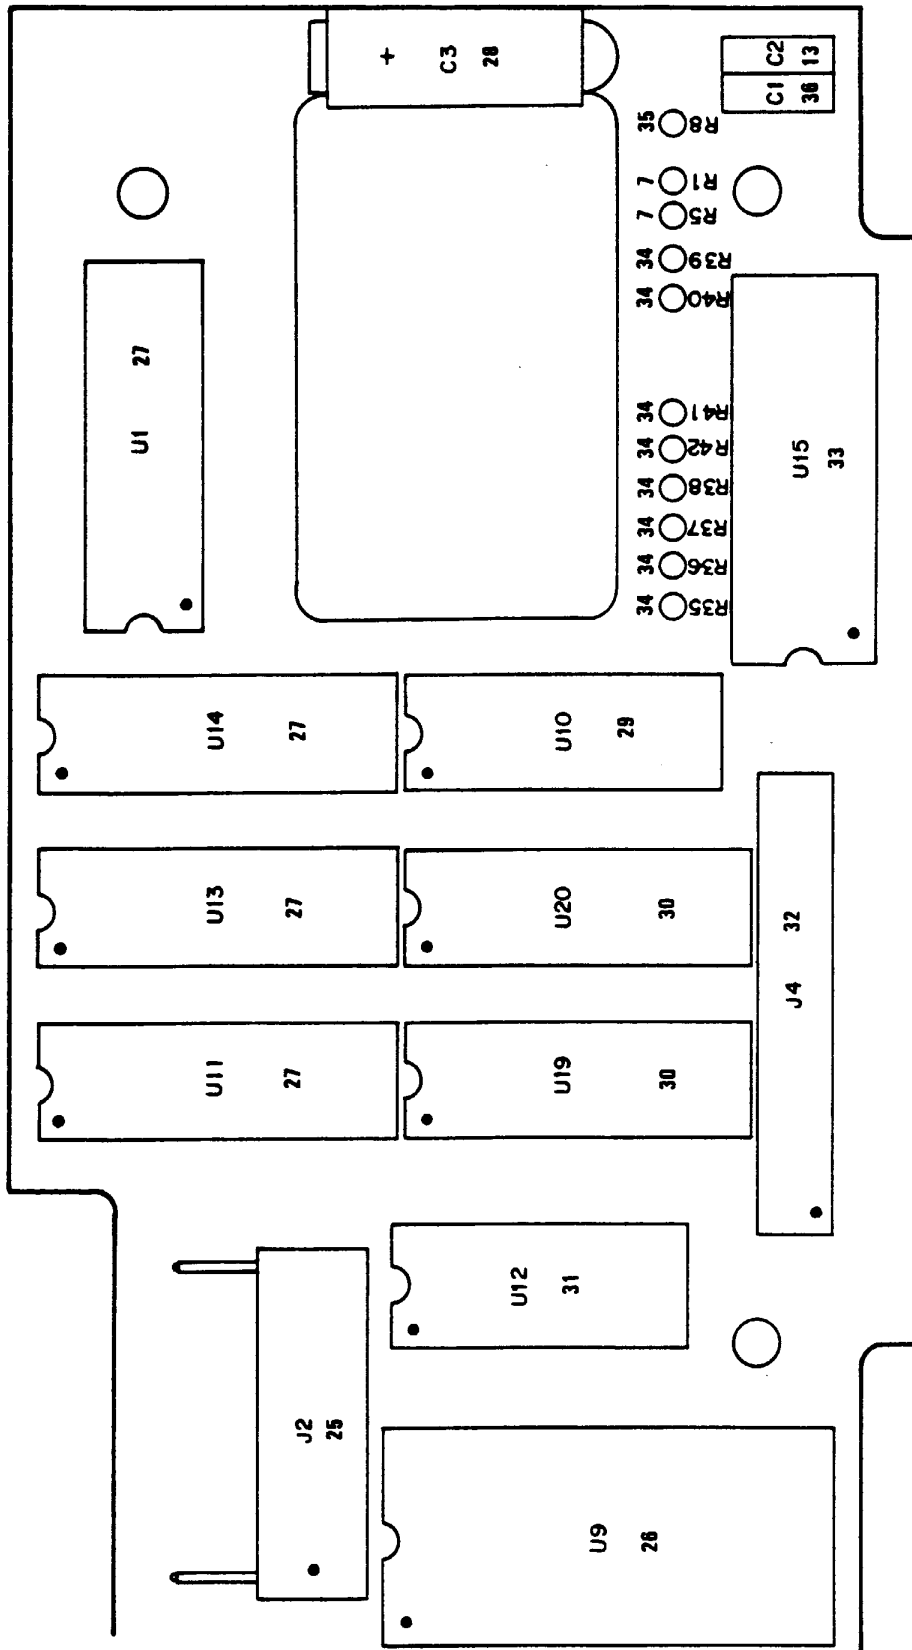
Interface Data Converter Circuit Card Assembly (Sheet 3 of 3)
